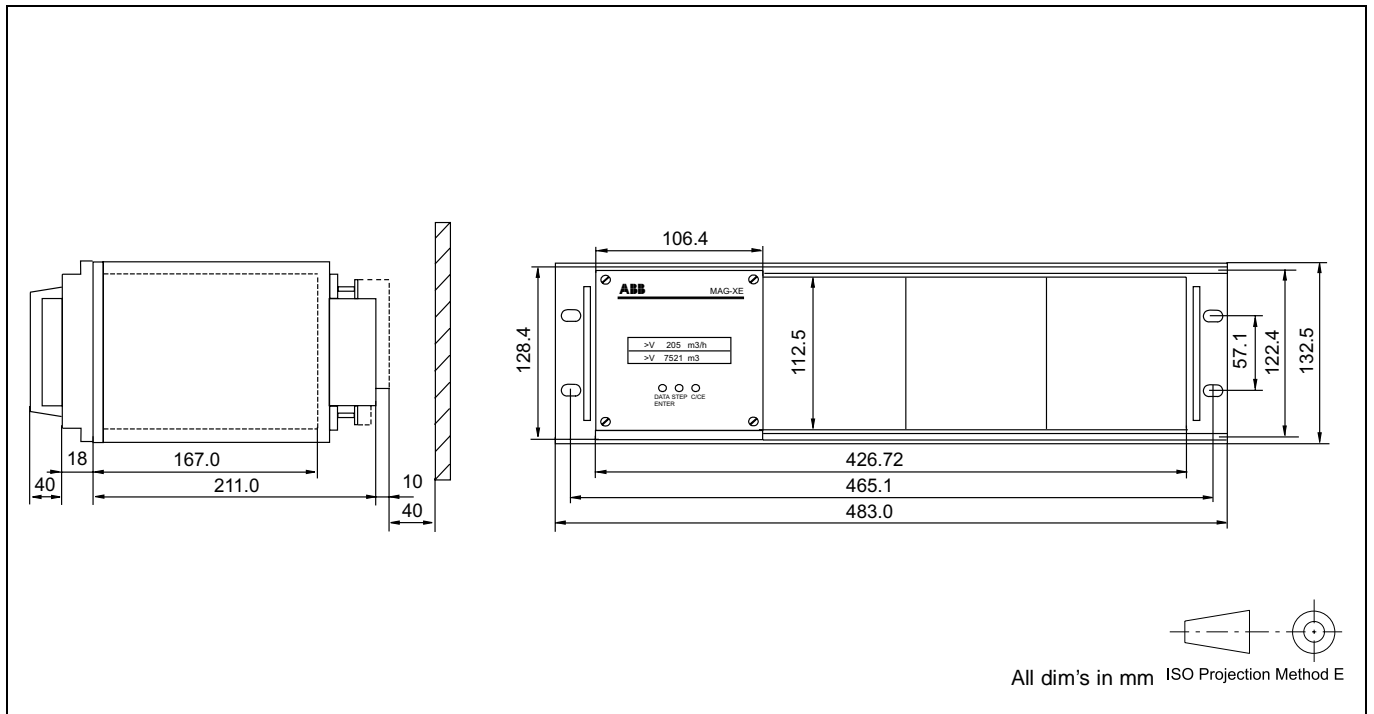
Dimensions, 19" Converter MAG-XE in Rack Mount Frame
